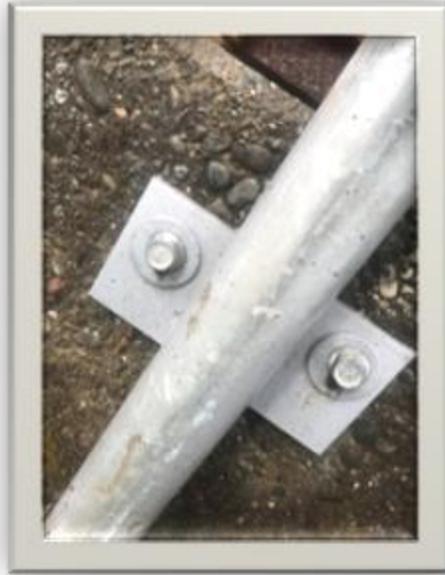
Welded flange prototype used to test function, sturdiness, and durability. By Hayden Miller.
